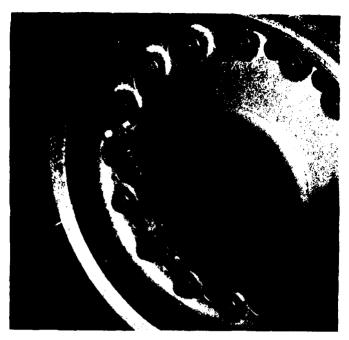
STEP 6 = REINSTALL WHEEL NUTS AND WASHERS
